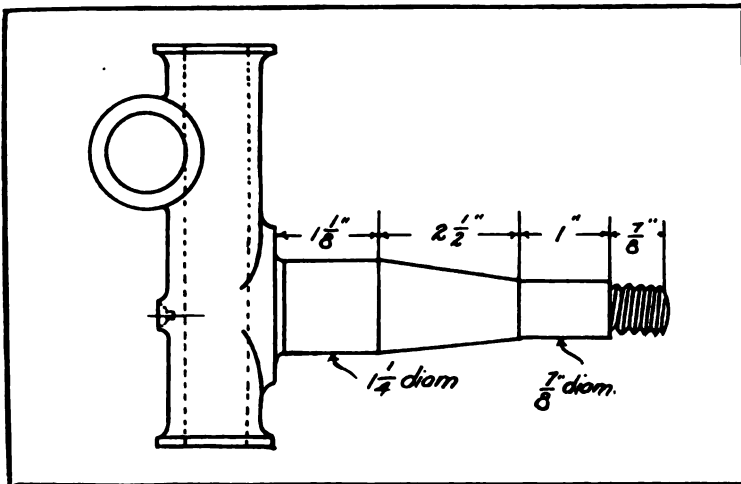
Spring Center and fixed Setting Piece O to locate shoulder for Grinding the Shank. (Carrier omitted, see Fig. 1)
